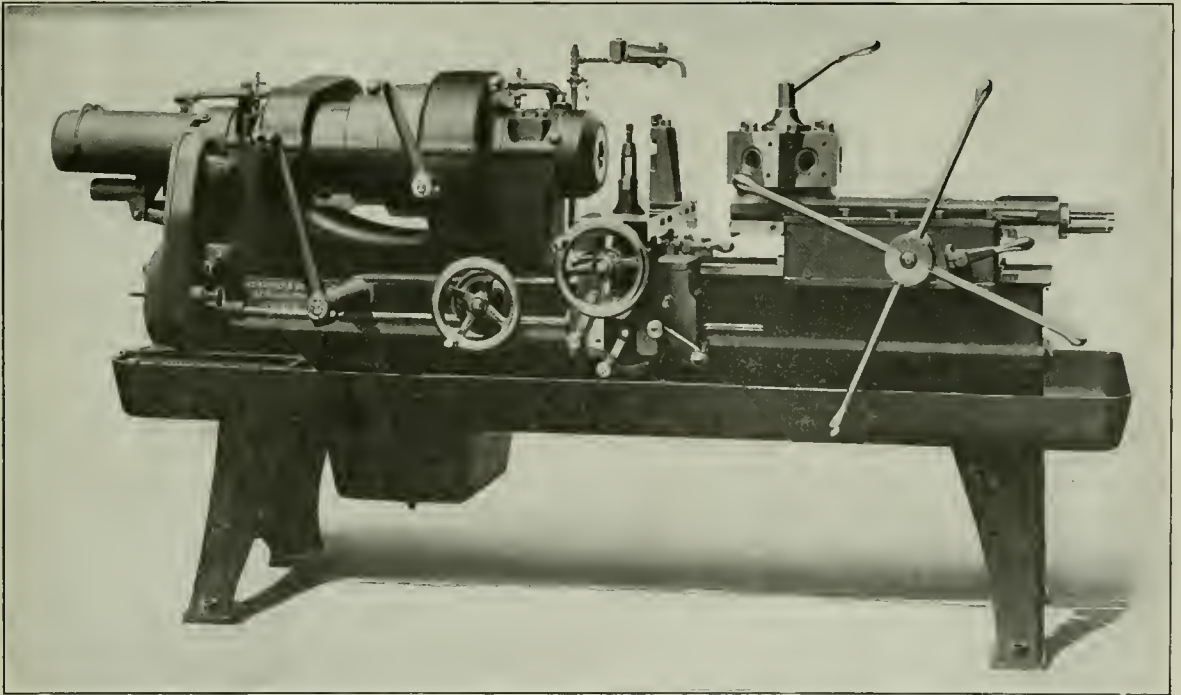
No. 6 Warner & Swasey High Production Turret Lathe.
